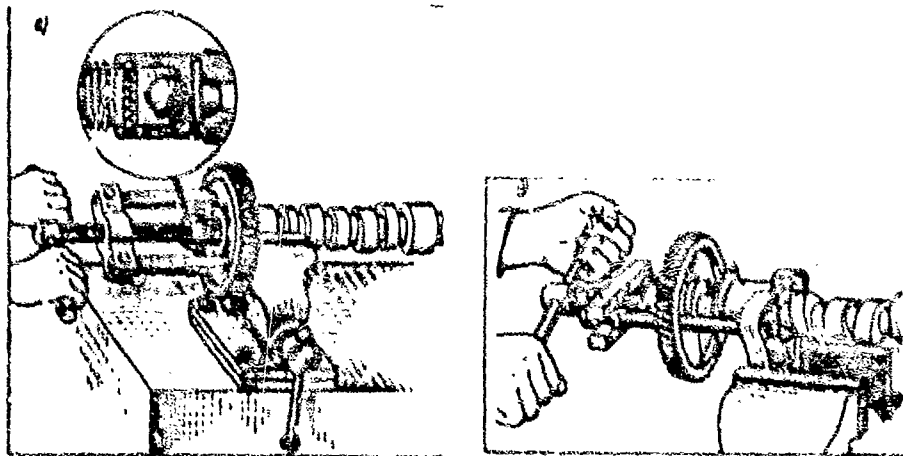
Pressing off and pressing on the camshaft gear:
